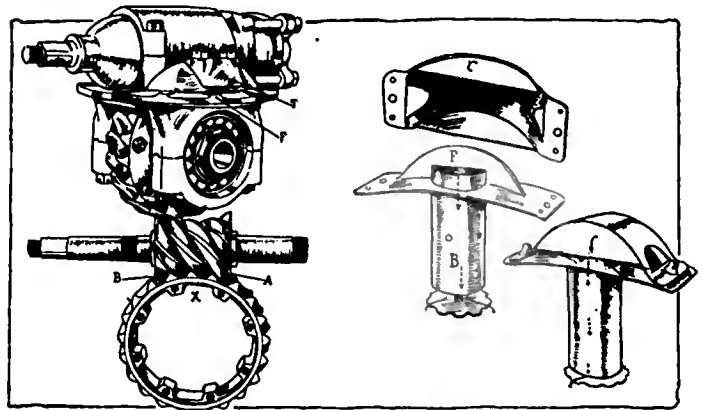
Benson drive. Fig. 3—Morrissey ventilator
